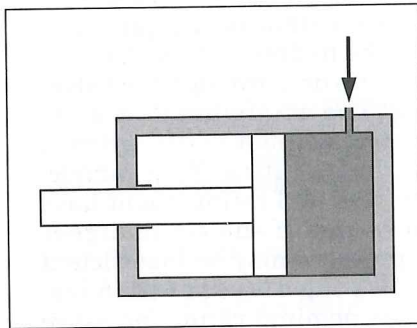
Single-acting cylinders provide power only to extend the rod.
